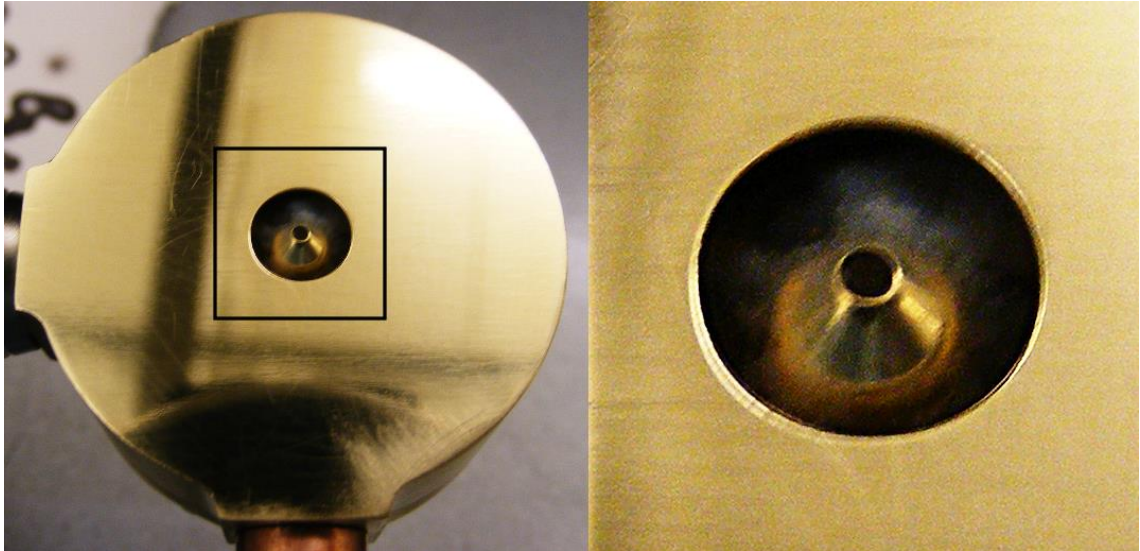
A picture of the upper (left) and lower (right) halves of the extraction head assembly after polishing.
